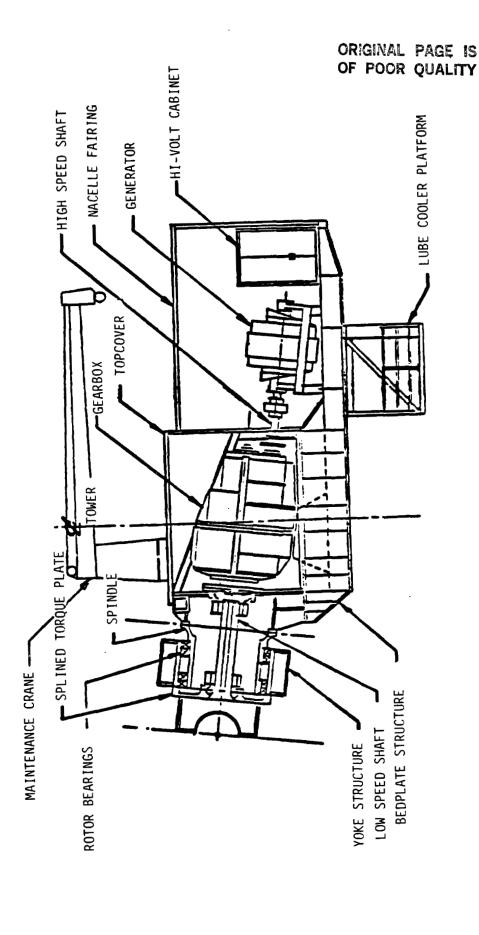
Nacelle Assembly with Yoke and Low Speed Shaft
